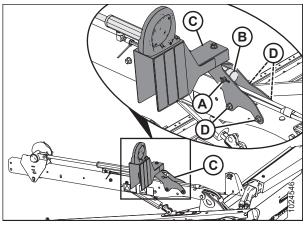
Left Reel Arm Cylinder in Forward Position
